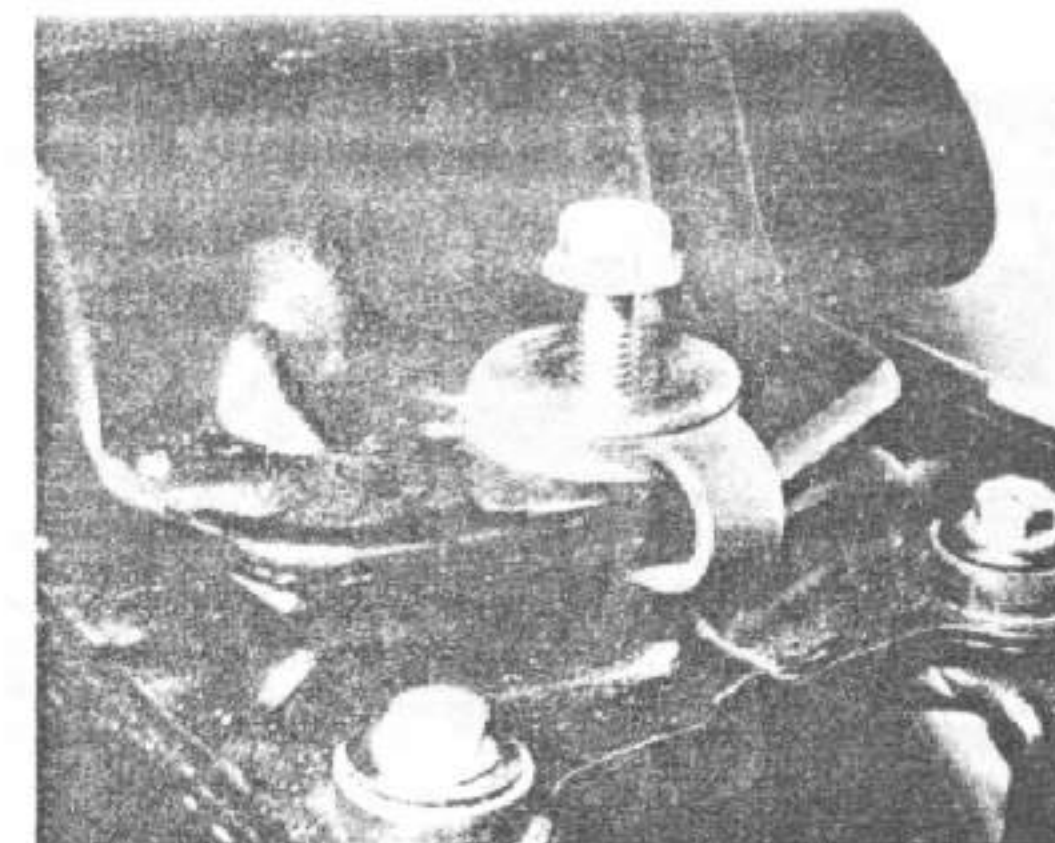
Rear of tank is held by rubber mounted securing bolt
